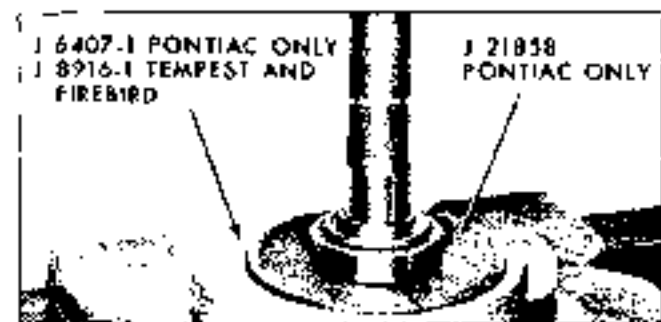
A-10 Removing Axle Shaft Bearing (Typical)
